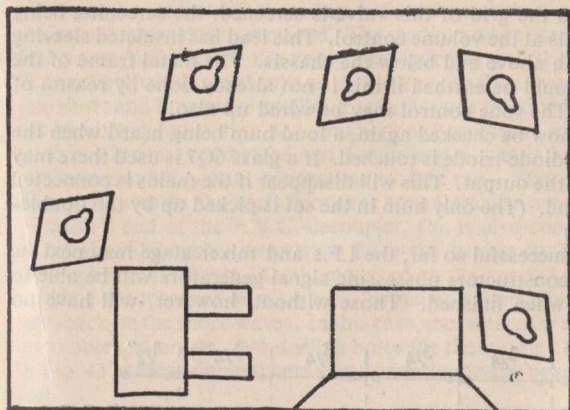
Direction in which spigot keys of valve holders should be mounted for shortest wiring.
